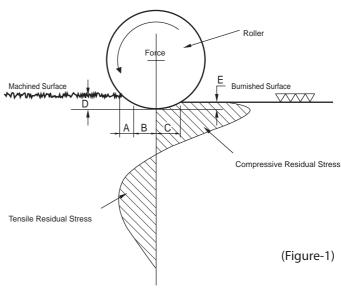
presents a pattern diagram of roller burnishing process for a spherical roller. The first contact to the machined surface occurs in Section (A). In section (B) the yield point of the surface is exceeded and plastic deformation takes place. Pressurized depth can be seen here as (D). After the material has been subjected to the maximum compressive strain, in section (C) it begins to elastically relieve (E) through the finishing zone finally leaving with a smooth surface and a compressive residual stress of significant peak value.
